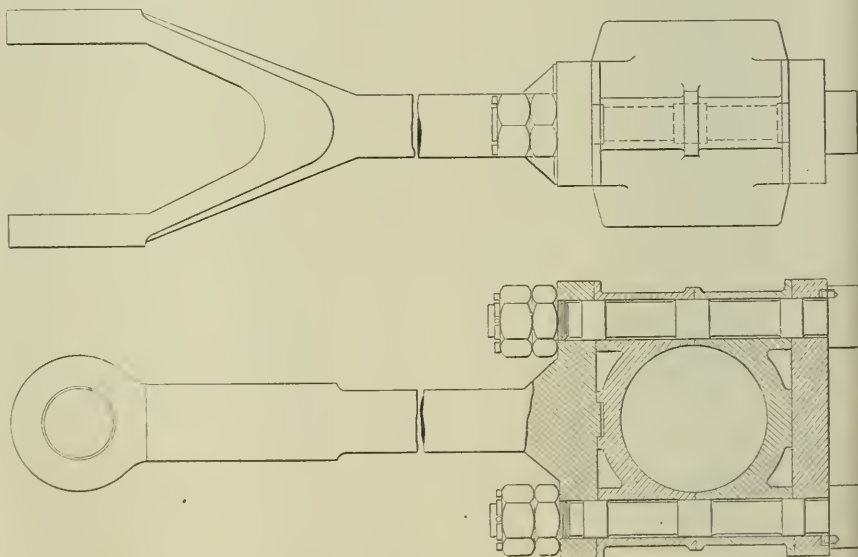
TWO-BEARING CROSSHEAD OF MARINE TYPE
